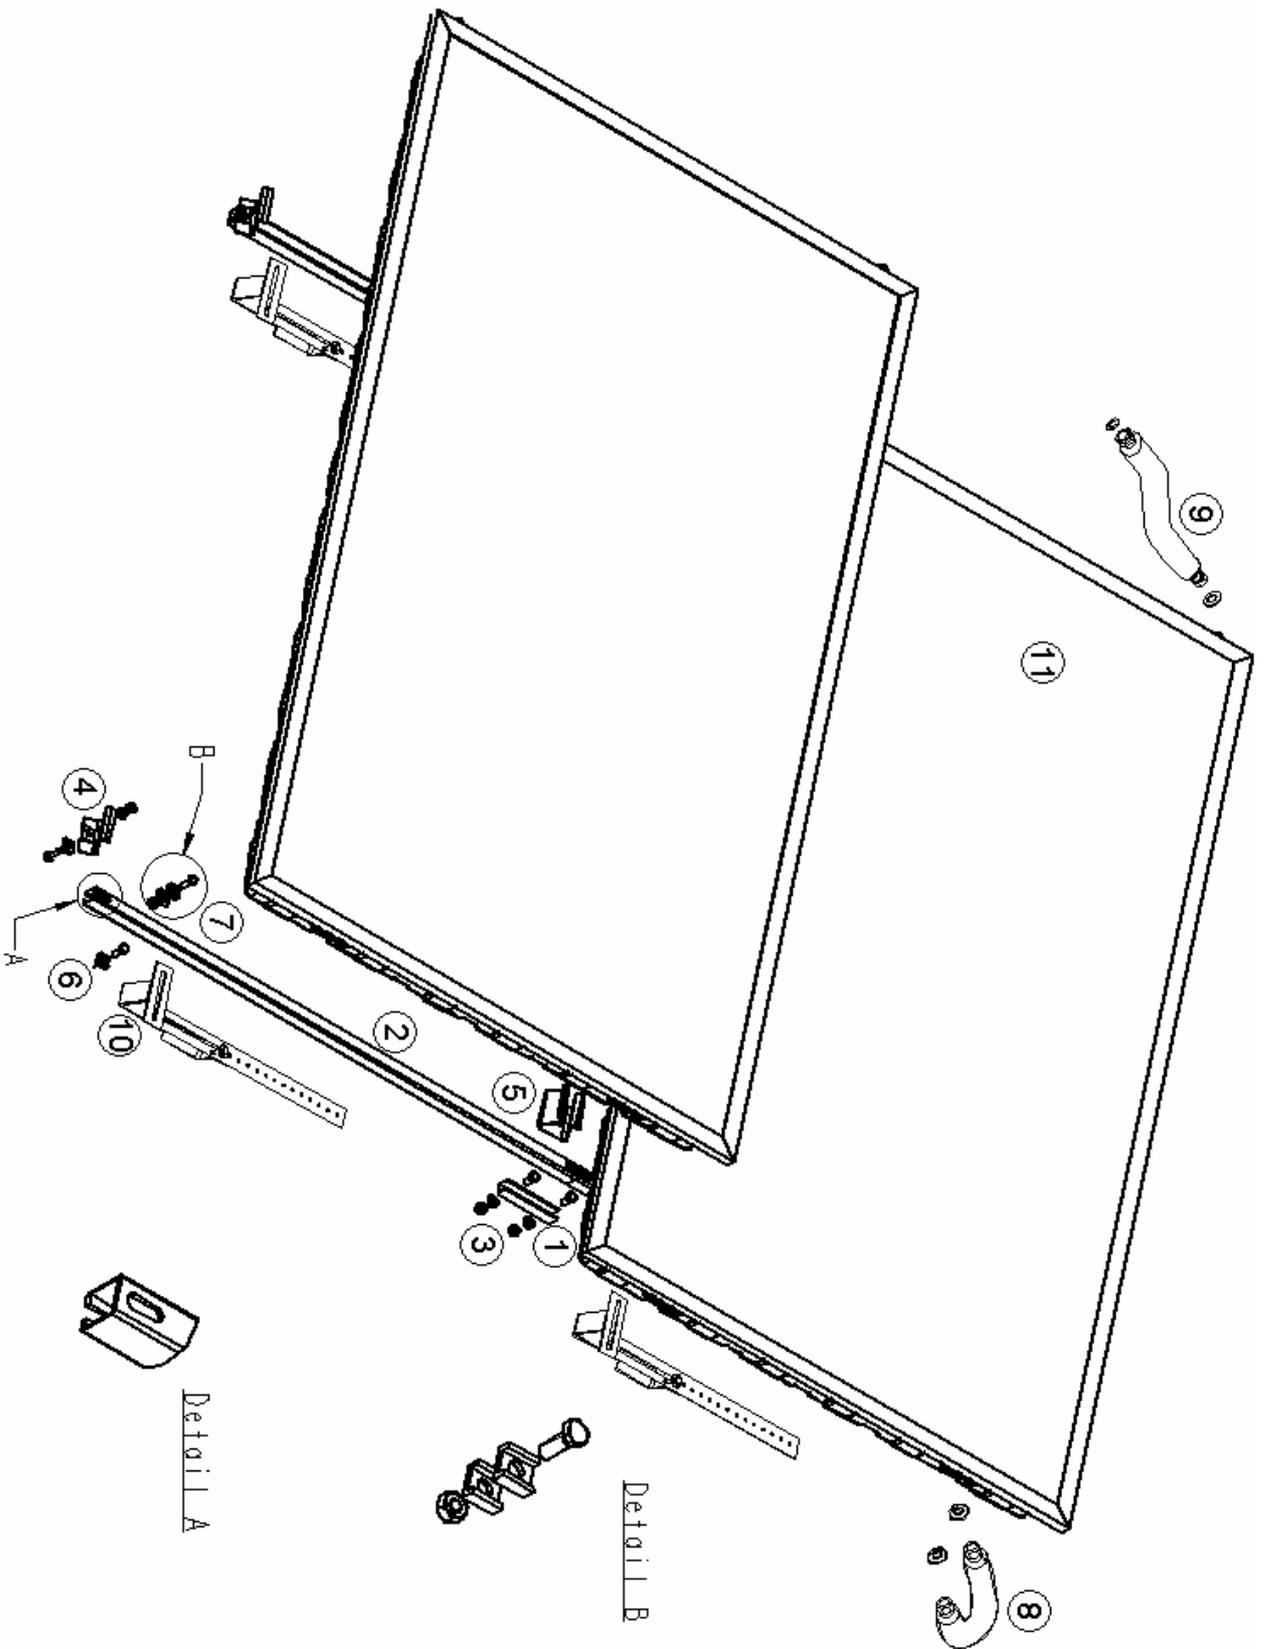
Exploded View Of Horizontal Collector Arrangement
